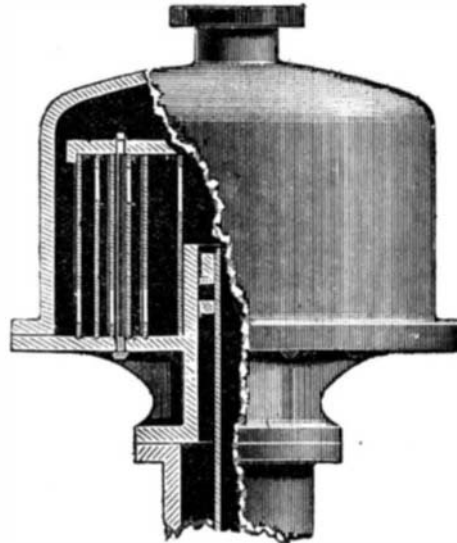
HALF ELEVATION AND SECTION OF THE SEPARATOR.
